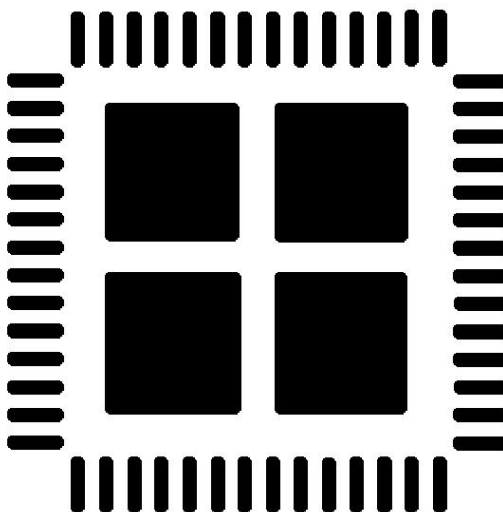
Recommended Solder Paste Mask for 56TQFN Package
